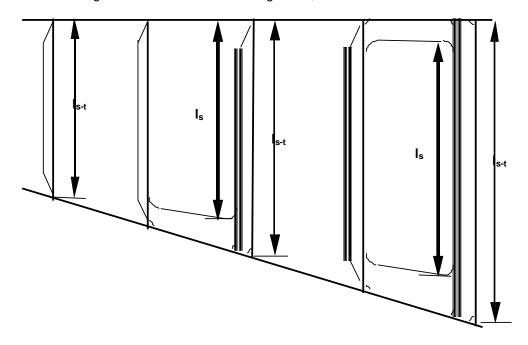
Stiffening of floors and girders in after peak tank
